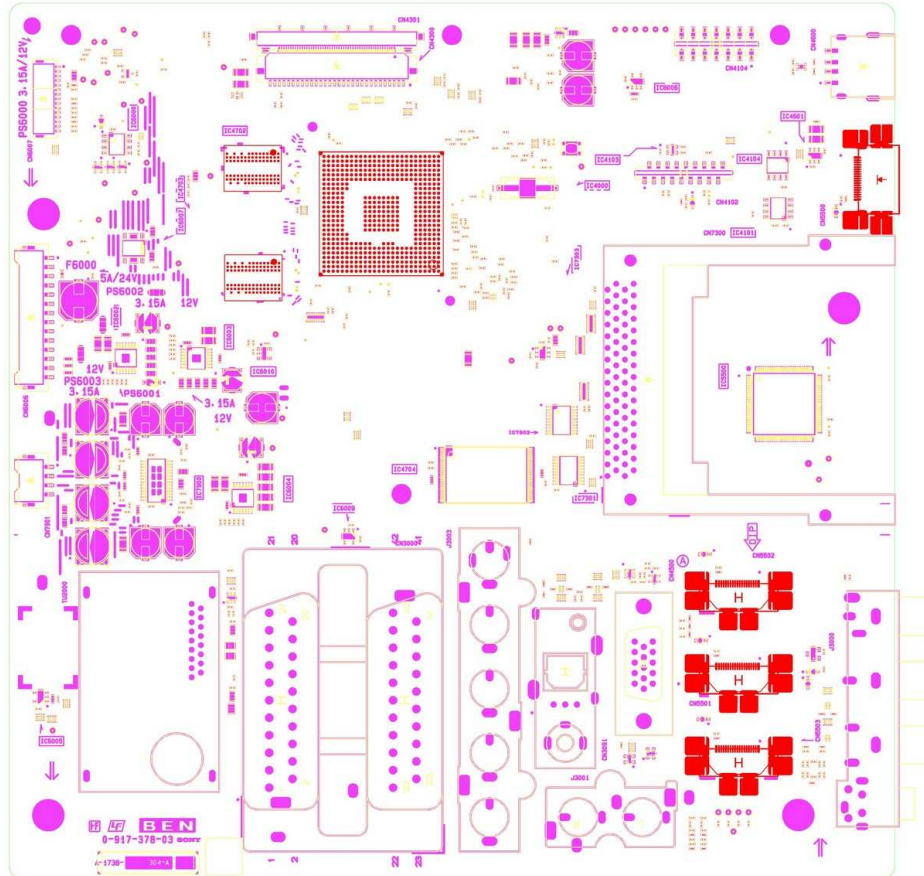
Top Side view of components (remarked in red) in BEN board with no visual access to solder joints with a vertical field of view (FOV)
